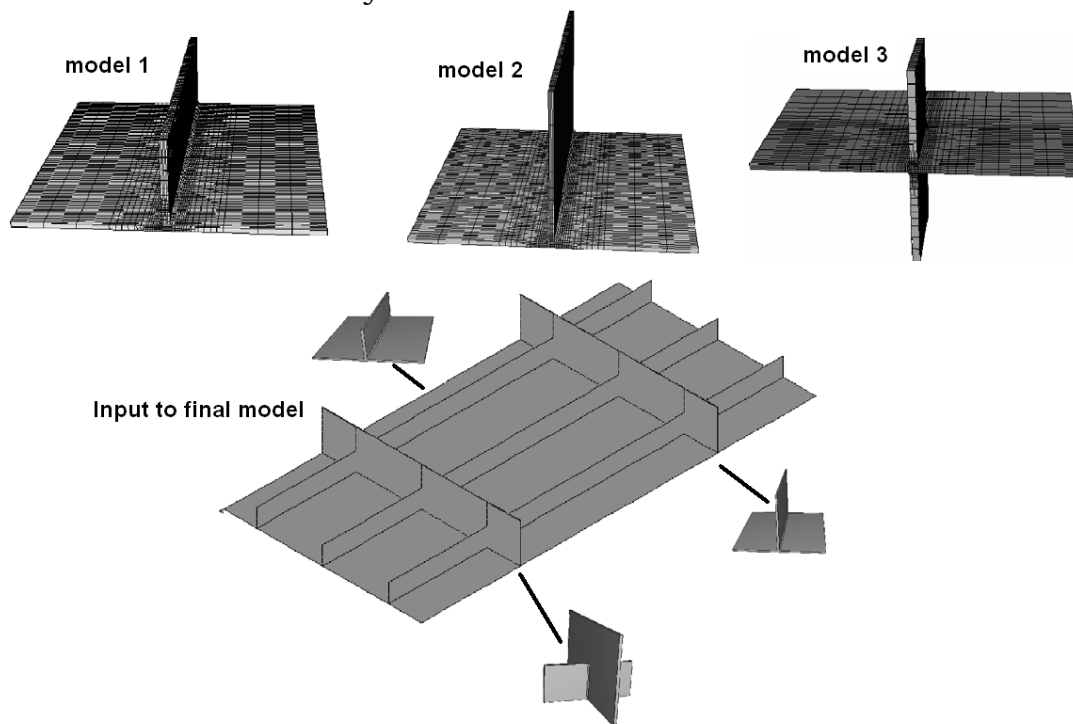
The three separate welding models and the addition with the sub-structuring technique to the final model of the welded section [21]
